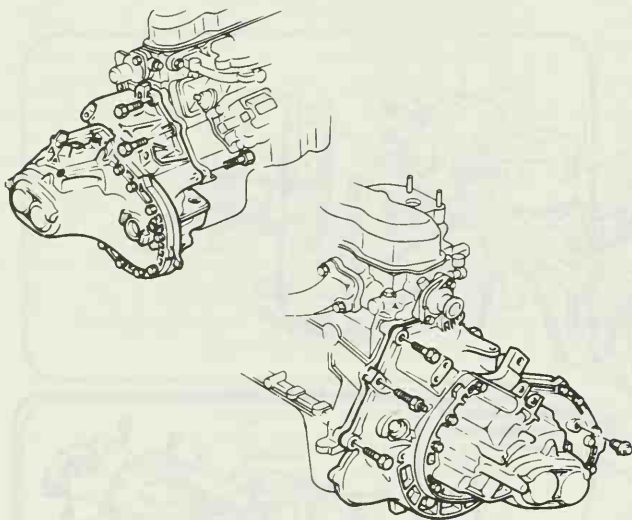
The transaxle-to-engine bolts are removed to separate the engine from the transaxle. (Chevrolet Motor Division of General Motors Corporation)
